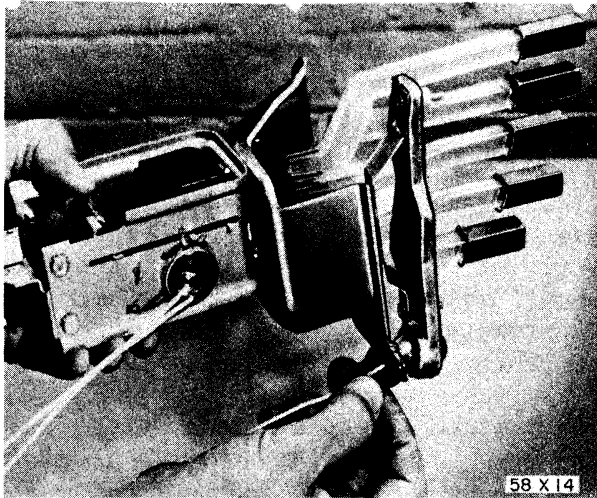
Illuminating Lamp Bulb Installation—Imperial Models
